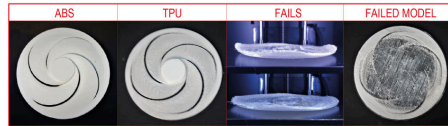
3D Printed Models of 150mm-long Prototype in ABS, TPU and SMP.
